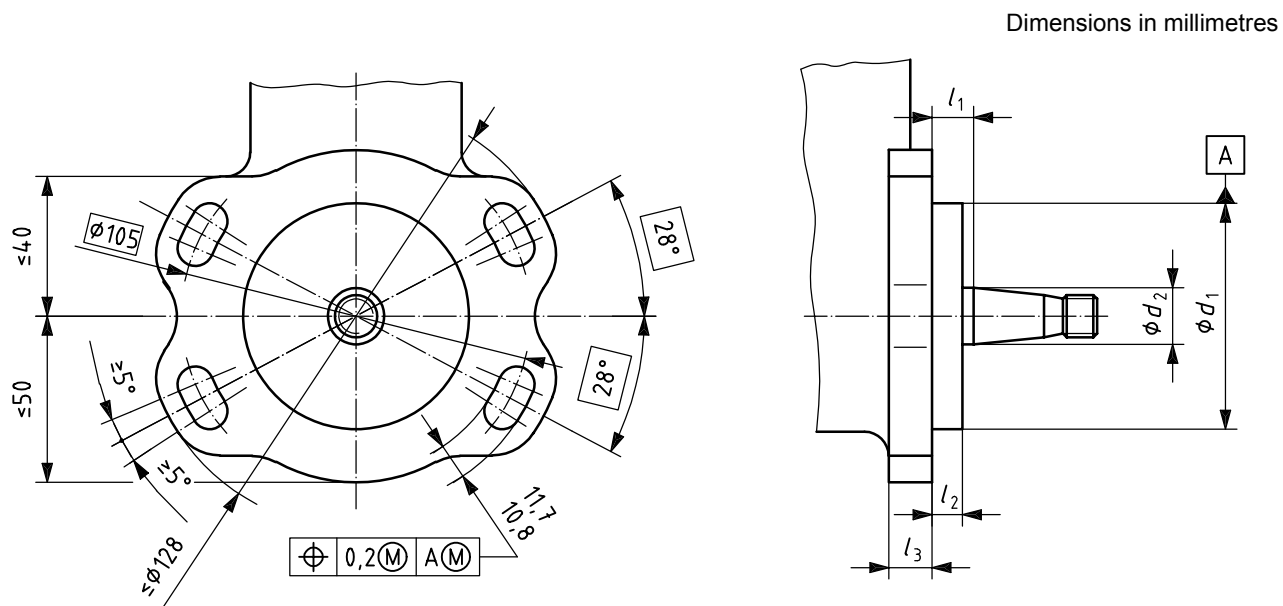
Fuel injection pumps — Type 7 end-mounting flange
